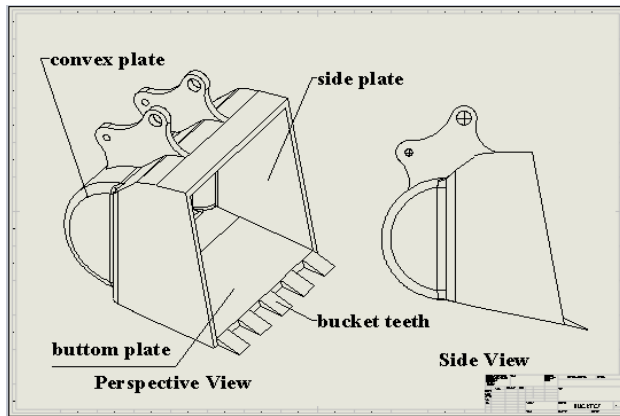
Typical Bucket: (a) Perspective view and (b) Side view
